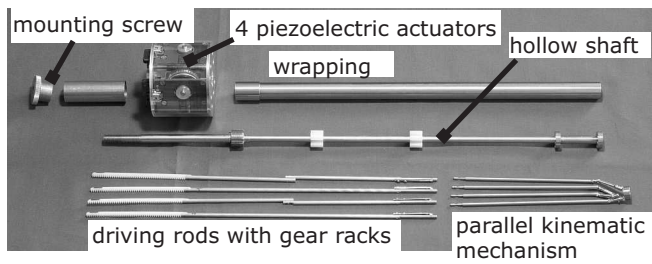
Disassembled instrument. Mounting the parts is done with one single mounting screw.
